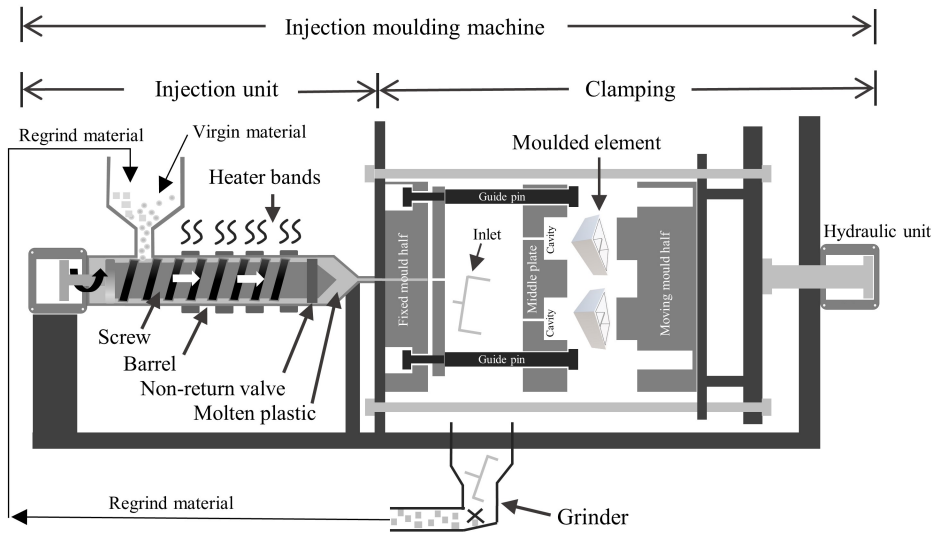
Illustration of an injection moulding machine with injection and clamping unit
